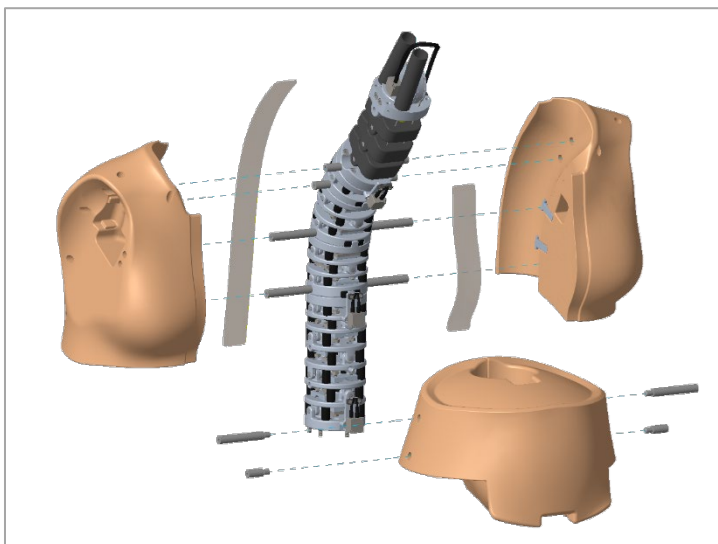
The chest halves, abdomen and Velcro strips; exploded view.
